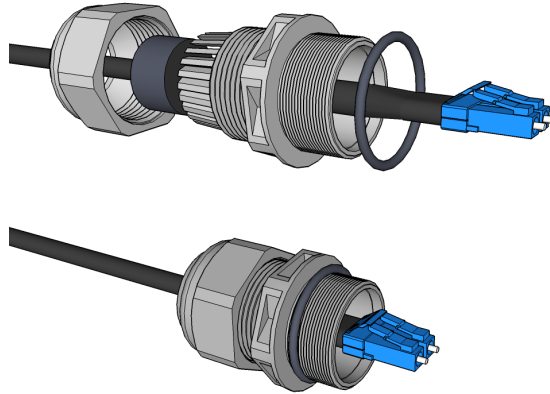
Bushing assembly for optical Ethernet (with *RACOM / OFA fibre*<sup>33</sup> optic cable)
